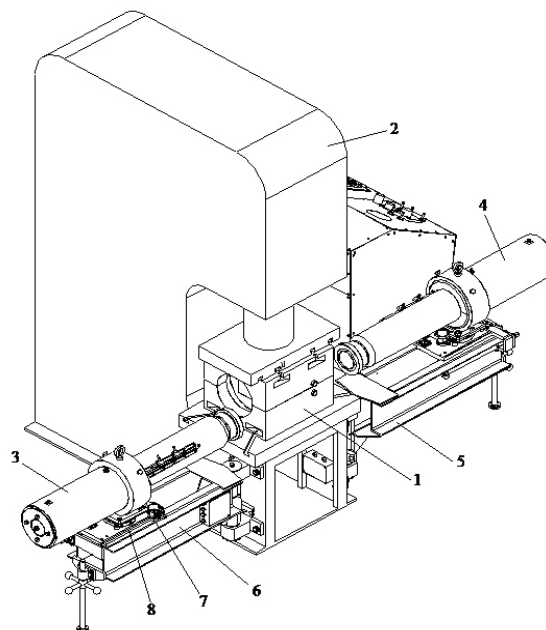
Major parts and components machine for forming pipe fittings elements:
